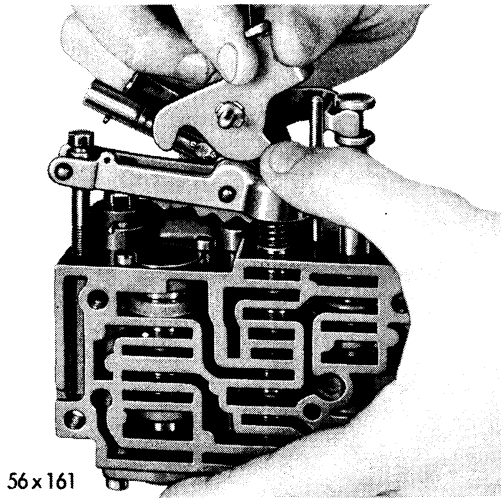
Compressing Throttle Valve Operating Lever to Remove Throttle Valve Camshaft
